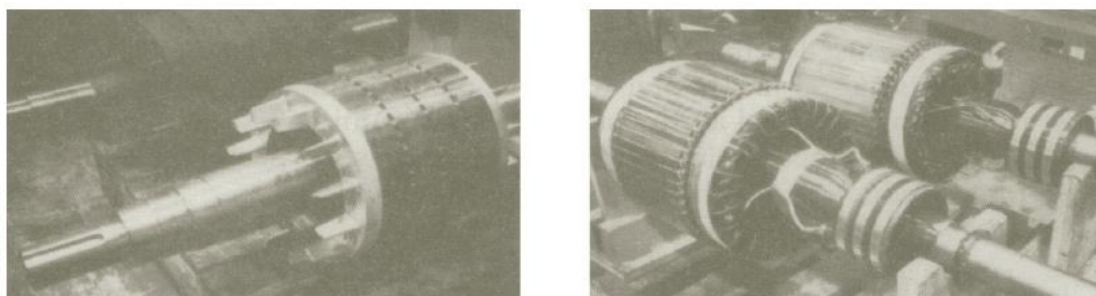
Rotor of an induction machine. (a) Squirrel-cage rotor. (b) Wound-rotor type [33]
